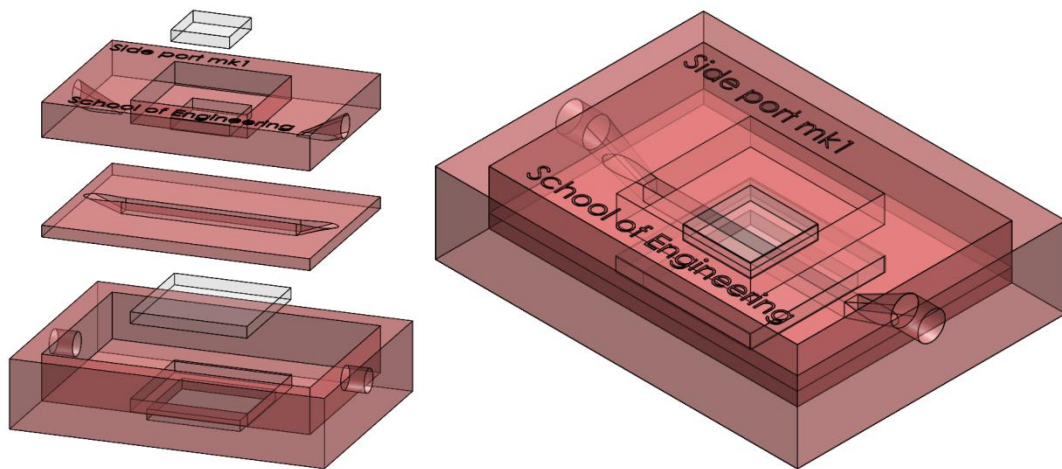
A dimetric (left) projection of a CAD model of the optical flow cell. The flow cell is exploded into the three component parts (left) and an isometric projection of the same three part optical flow cell shown assembled (right). Image not to scale.
